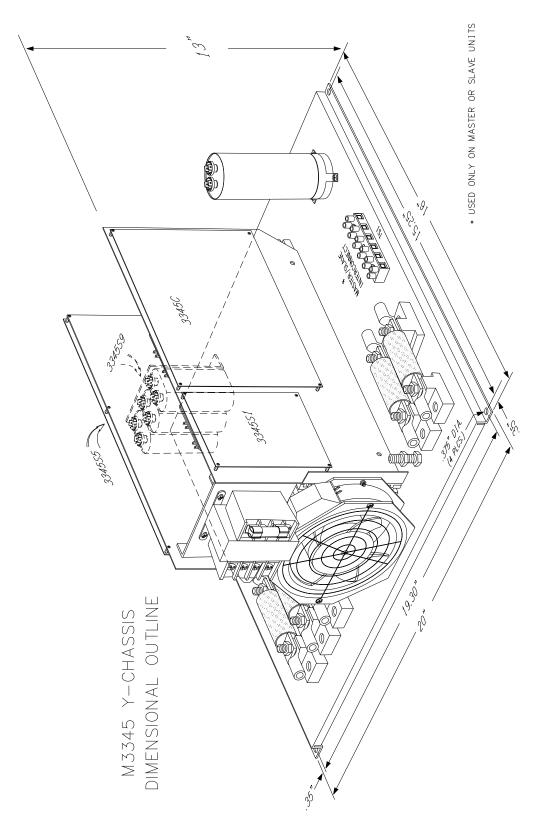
M3345 "Y" Chassis Dimensional Outline
